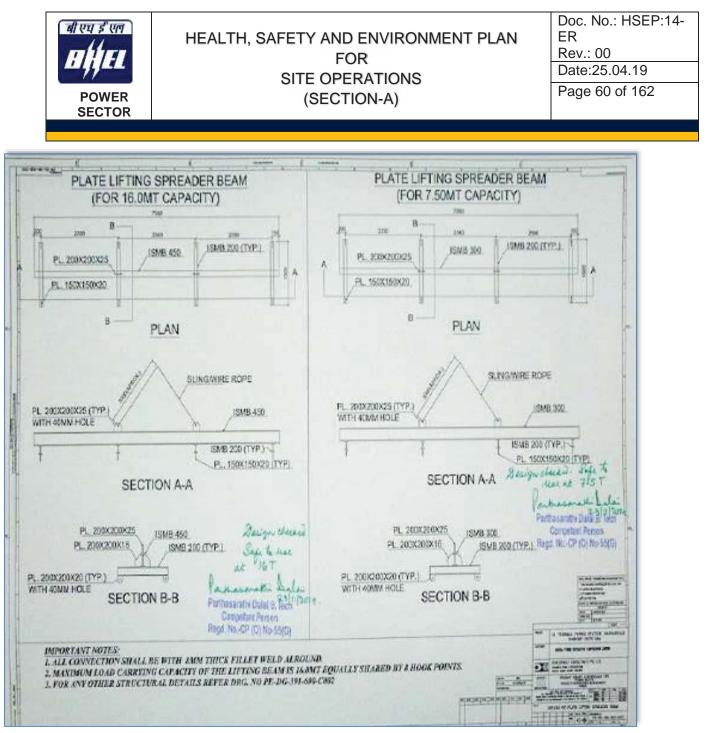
Typical Plate Lifting Spreader Beam Configuration for 7.5 MT and 15 MT Loads
